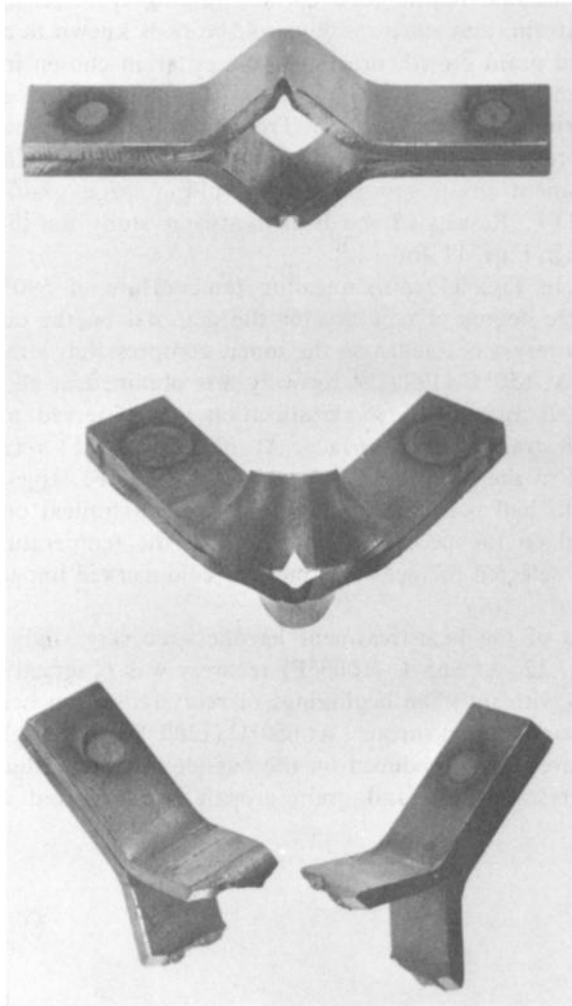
Tube corner impact specimen. Top: prior to test; middle: above transition temperature—no fracture; bottom: below transition temperature—fracture.
